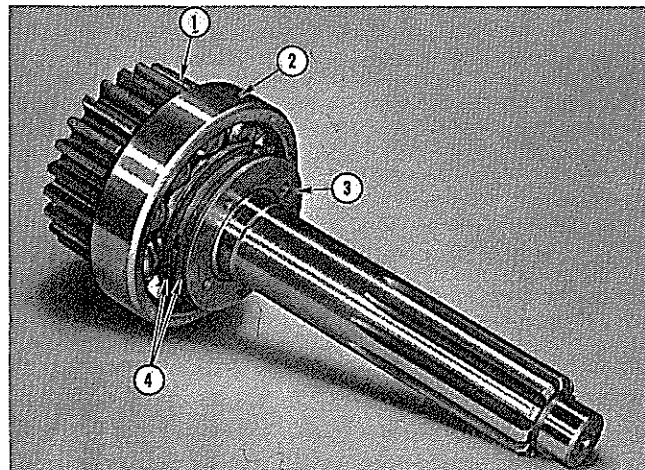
CLUTCH SHAFT AND DRIVE GEAR
